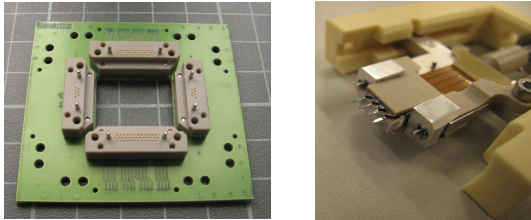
left: Printed Circuit Board bearing the connectors and the pogo pins microdrive, right: adapted for the silicon shank insertion
